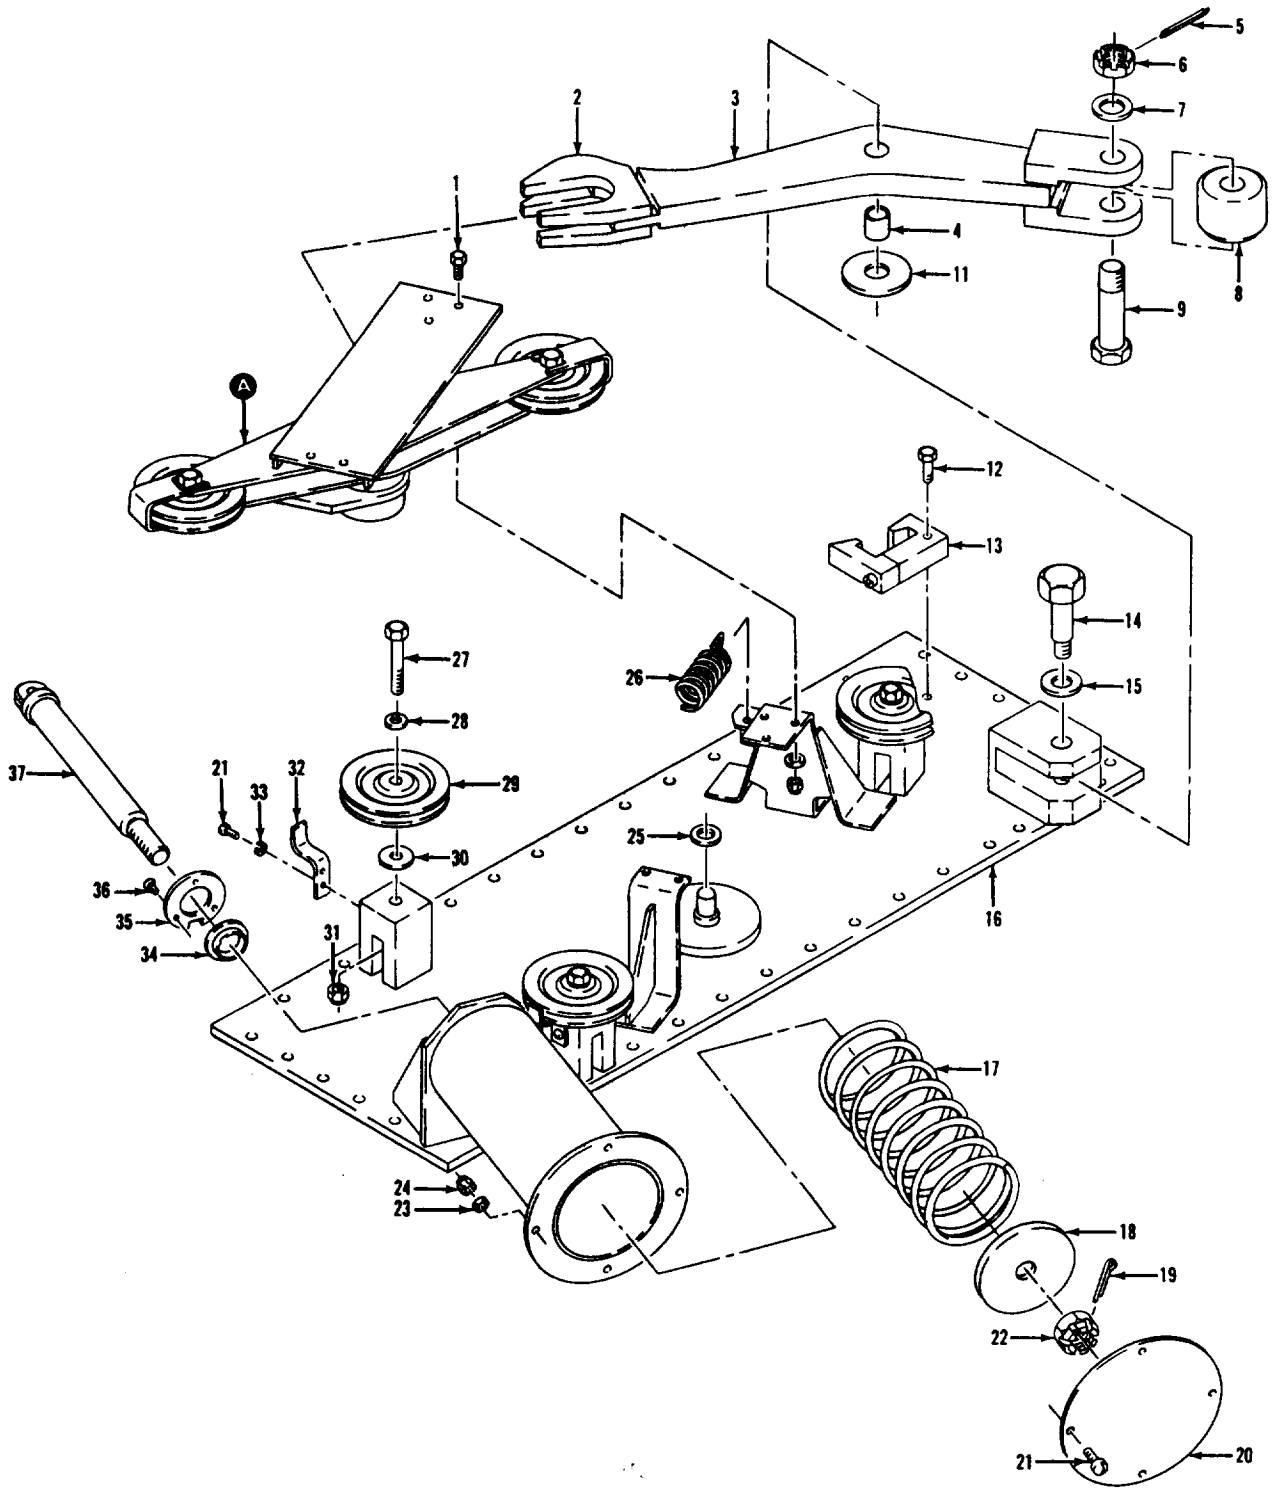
Centering Device Actuator Assembly (Sheet 1 of 3)
